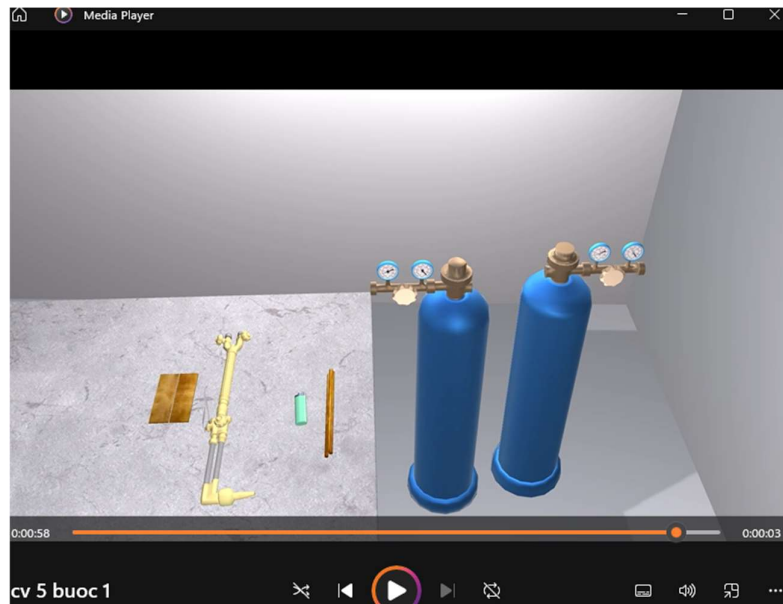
Tools, Equipment, and Components Used in the Practical Exercise
